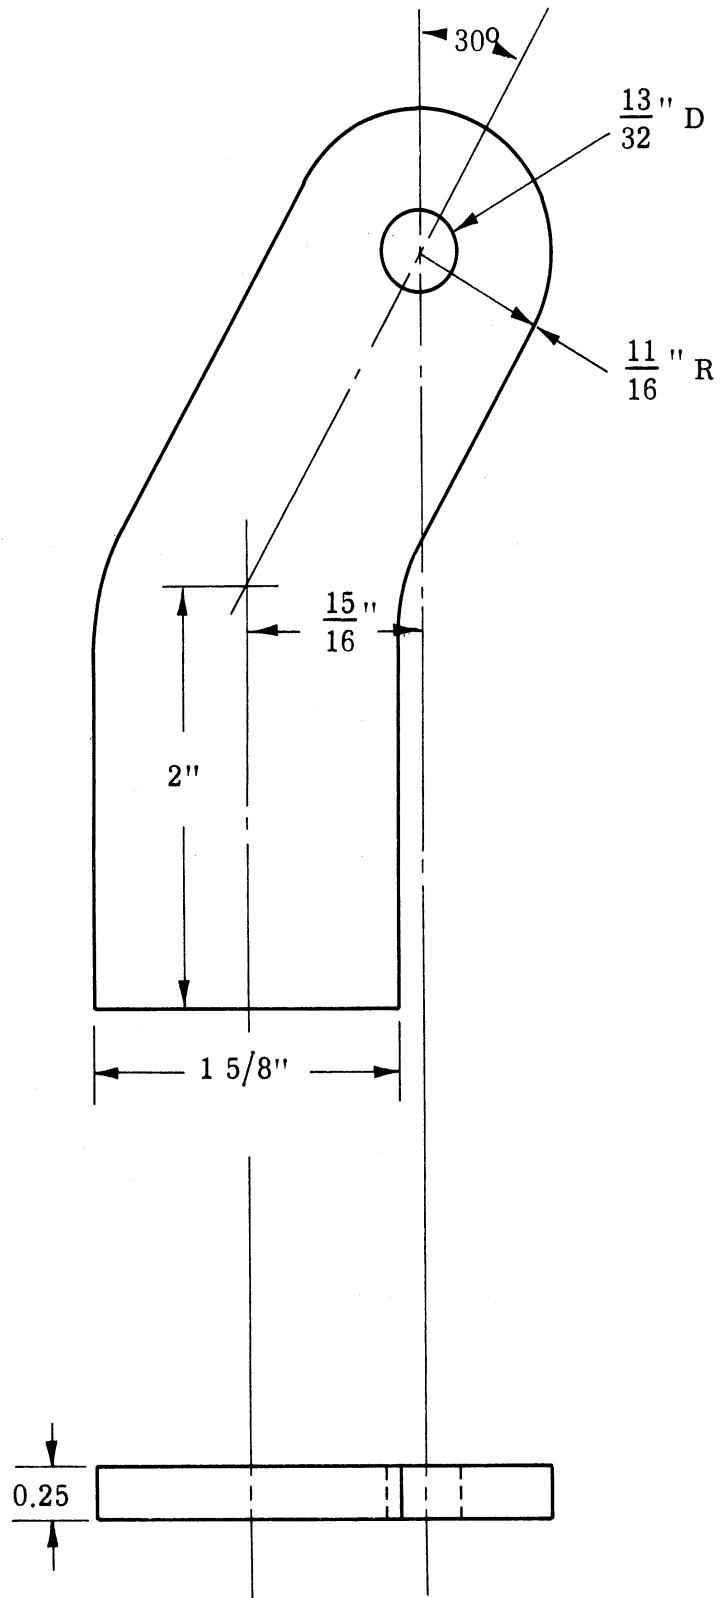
RIB - STRUT CONNECTING ROD (FULL SIZE)
